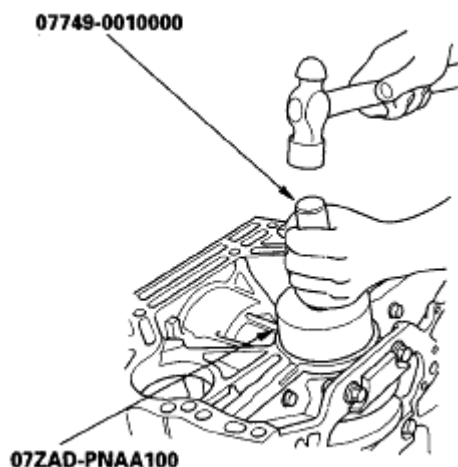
Driving Crankshaft Oil Seal Using Handle Driver & Oil Seal Driver Attachment
